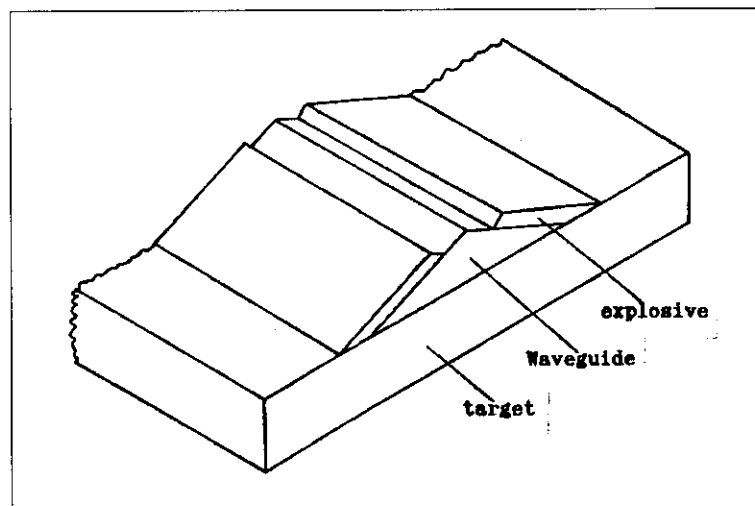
Fracture Belt with added Plane-Wave Generator relative dimensions [9].
